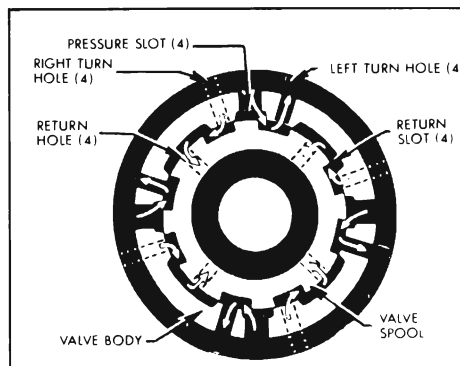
Upper End View of Rotary Valve - Left Turn
